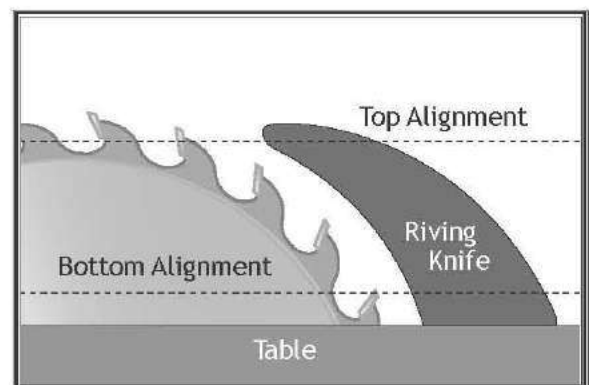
Example of checking top and bottom riving knife parallelism with blade.
